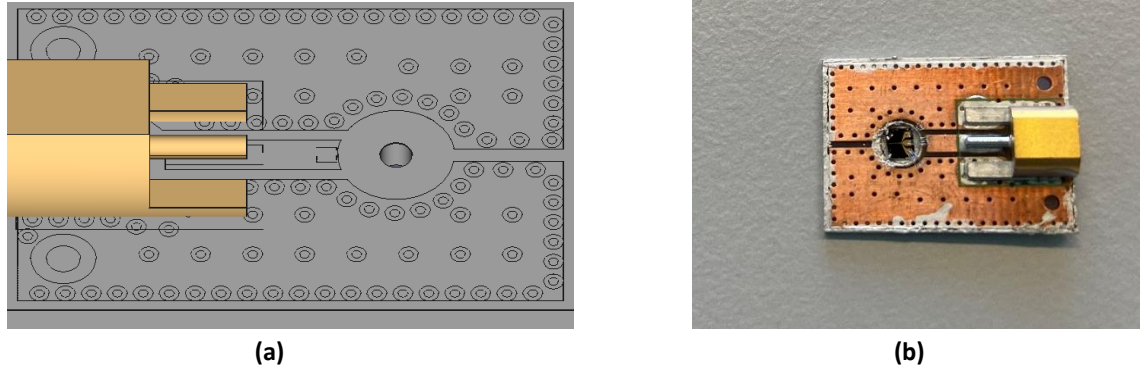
(a) CAD drawing and (b) final product of the PCB.
